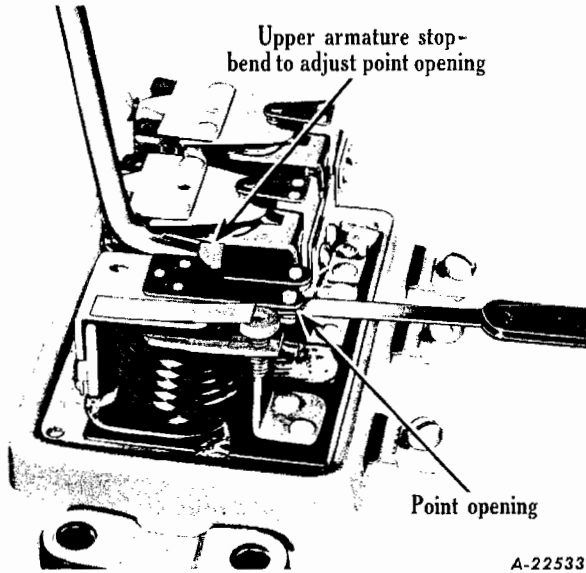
Cut-out relay point opening check and adjustment. Battery must be disconnected when this check is made.
